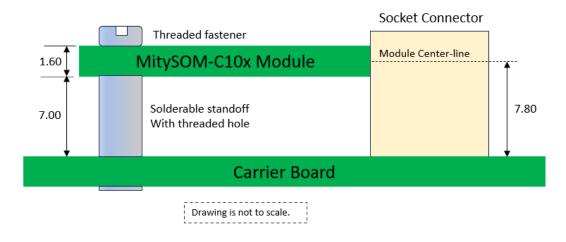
7.0 mm height standoff mounting: side view (card-edge receptacle shown)
